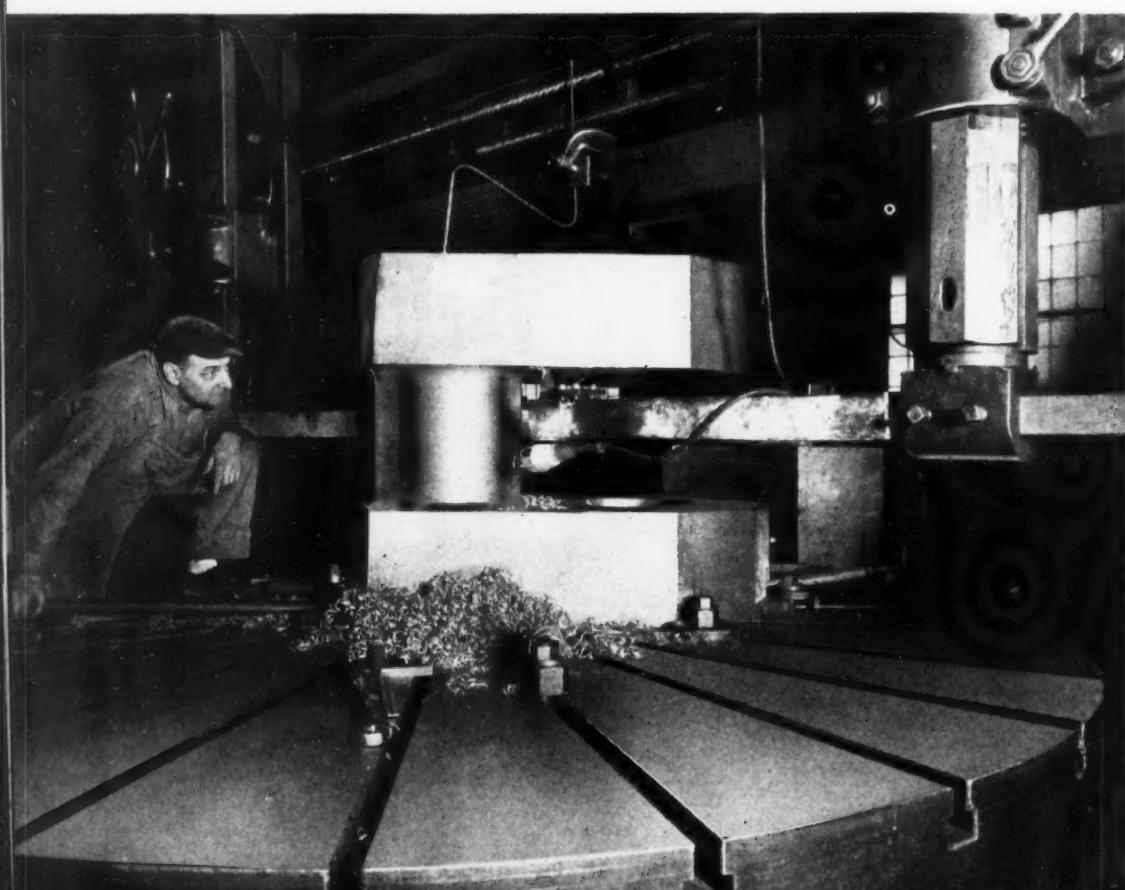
Turning the Crankpin of a Large Crankshaft Section by Means of a Special Boring-bar Used on a Vertical Boring Mill
